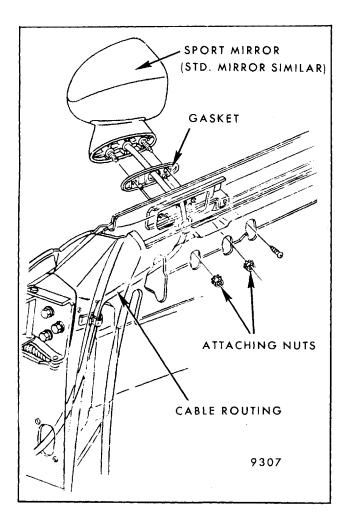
Door Outside Remote Mirror - Typical, All Styles - Right Side
